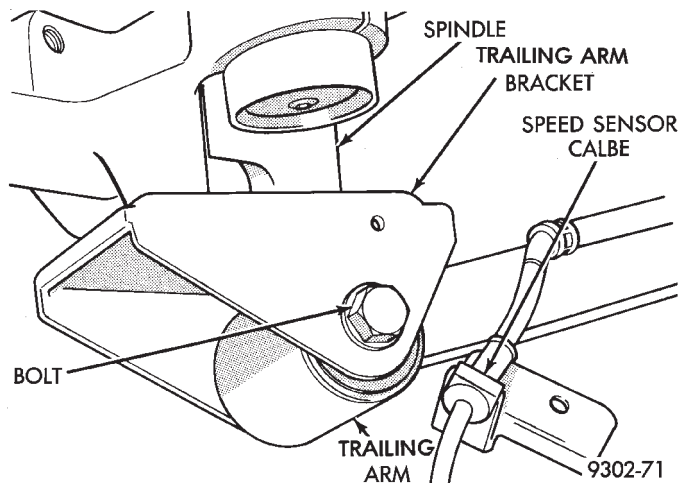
Trailing Arm To Spindle Bracket Bolt
